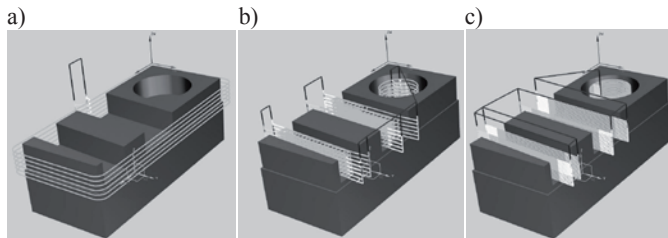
Tool paths in consecutive stages of milling: a) outer surface roll forming, b) rough milling of ribs and circular pocket, c) roll forming of ribs and circular pocket
